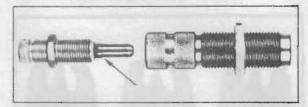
Conventional sizing dies are usually employed in resizing cases for cast bullets. Special dies are available. The Lyman sizer die illustrated incorporates an expander plug with a shoulder (arrow) which slightly flares out the case mouth to minimize bullet shaving. In the bullet seating operation, the flare is "ironed out" by the crimper.
